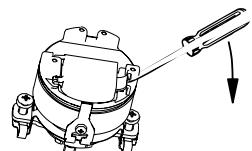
Assembly figure for SKS36S/SKM36S tapered shaft
